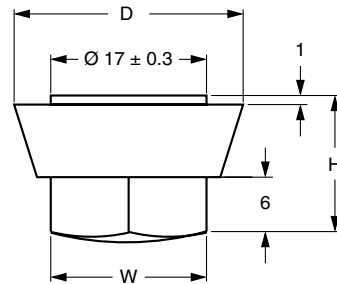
Synthetic cap nut; see Table 2 for dimensions D, H and W
